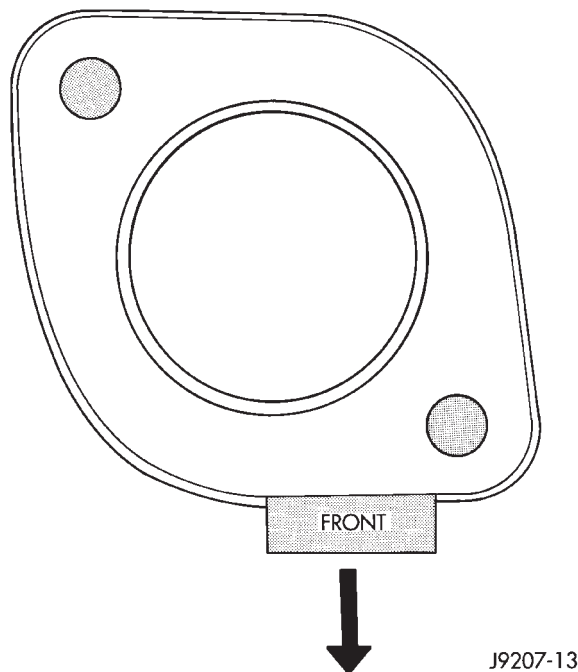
Thermostat Position—3.9L V-6 or 5.2/5.9L V-8 Gas Engines
